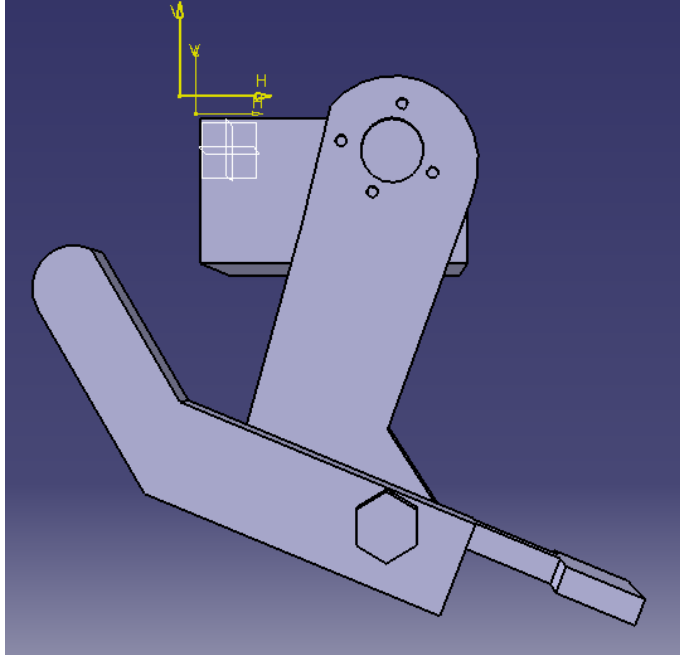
Front view of Brake actuator fitted to the brake pedal with a bolt
